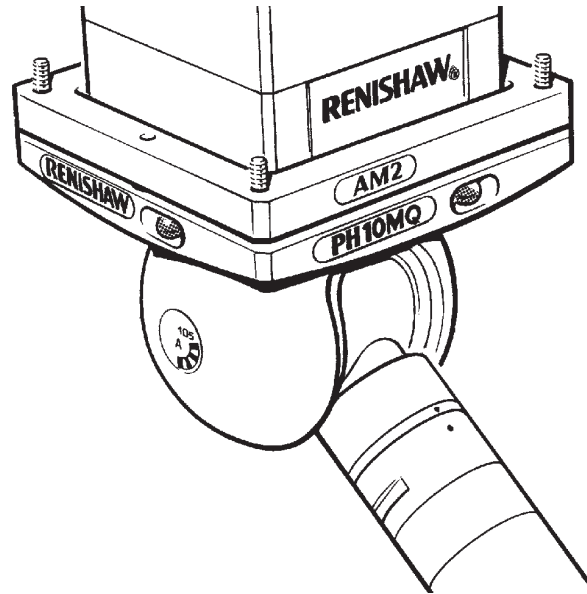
The AM2 fitted with a PH10MQ PLUS motorised probe head
